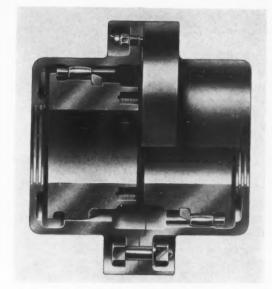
Flexible clutch embodying barrel-shaped pins as drivers
